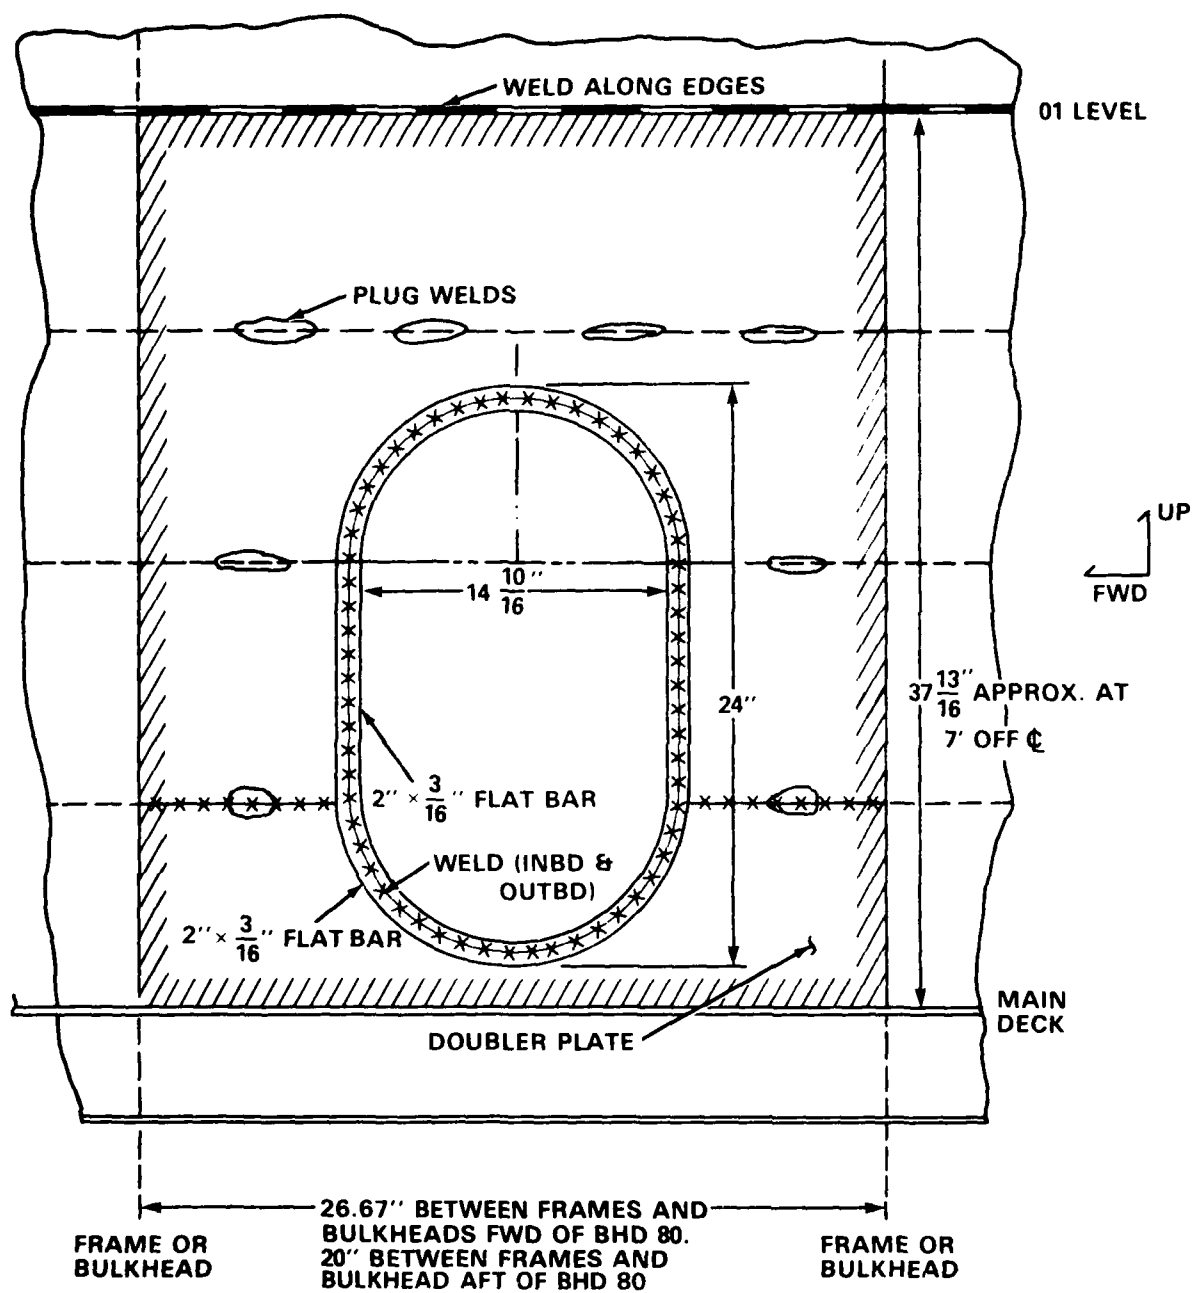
Typical Deckhouse Side Access Hatch Opening after Structural Modification
